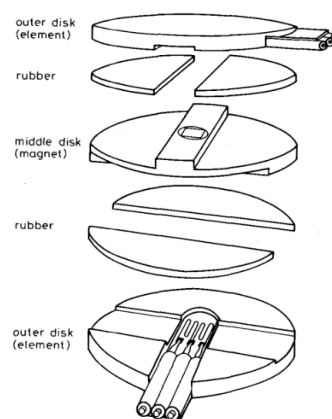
Exploded assembly of the biaxial shear transducer (21)
